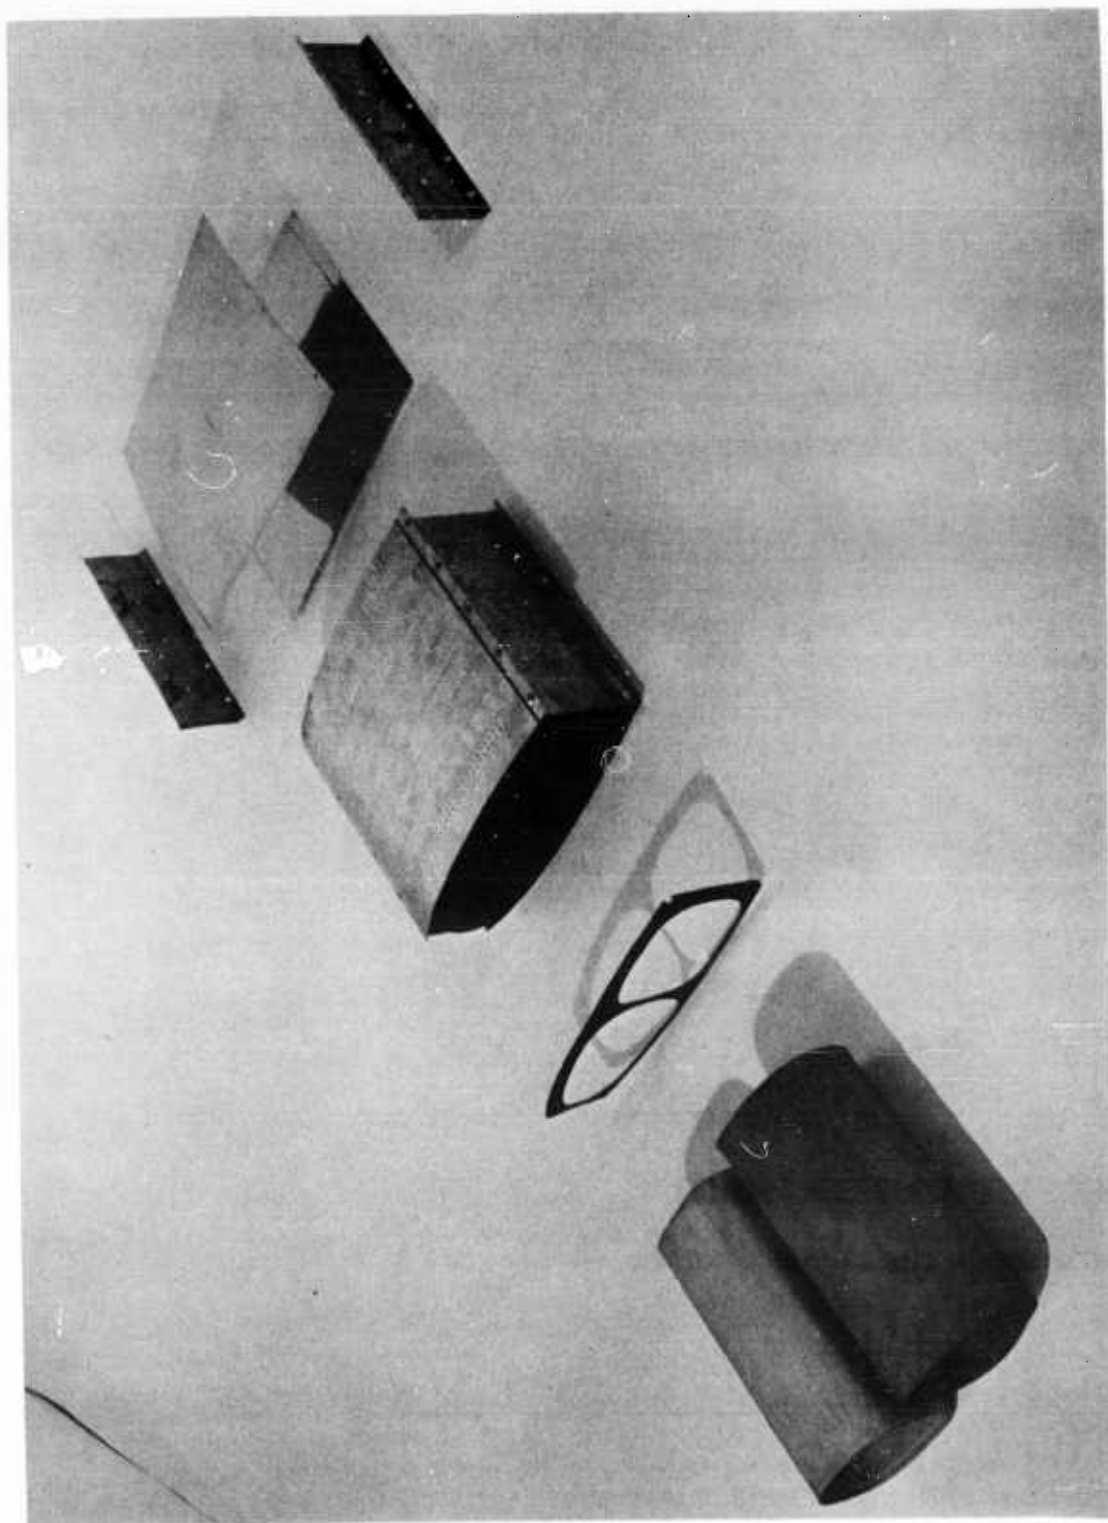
Blade Forward Segment and Detail Parts
